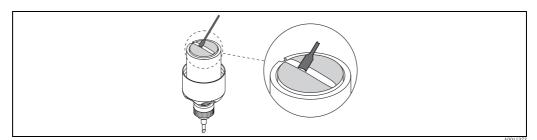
Coating the contact surfaces of the sensor with coupling fluid
